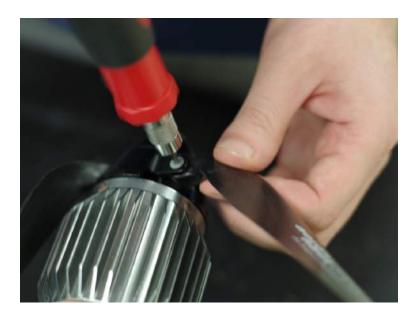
Attach the propeller using screwdriver and screw while being careful not to over tighten.
